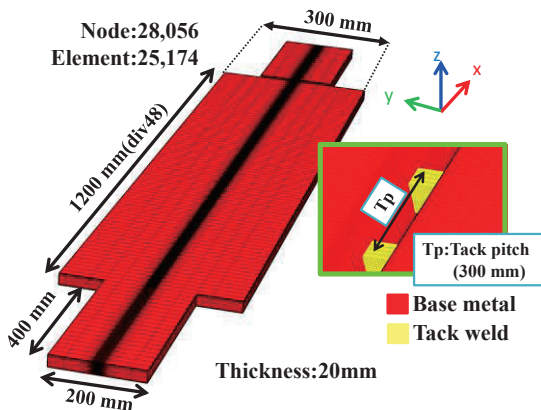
Shape and size of test specimen for FCB welding.
